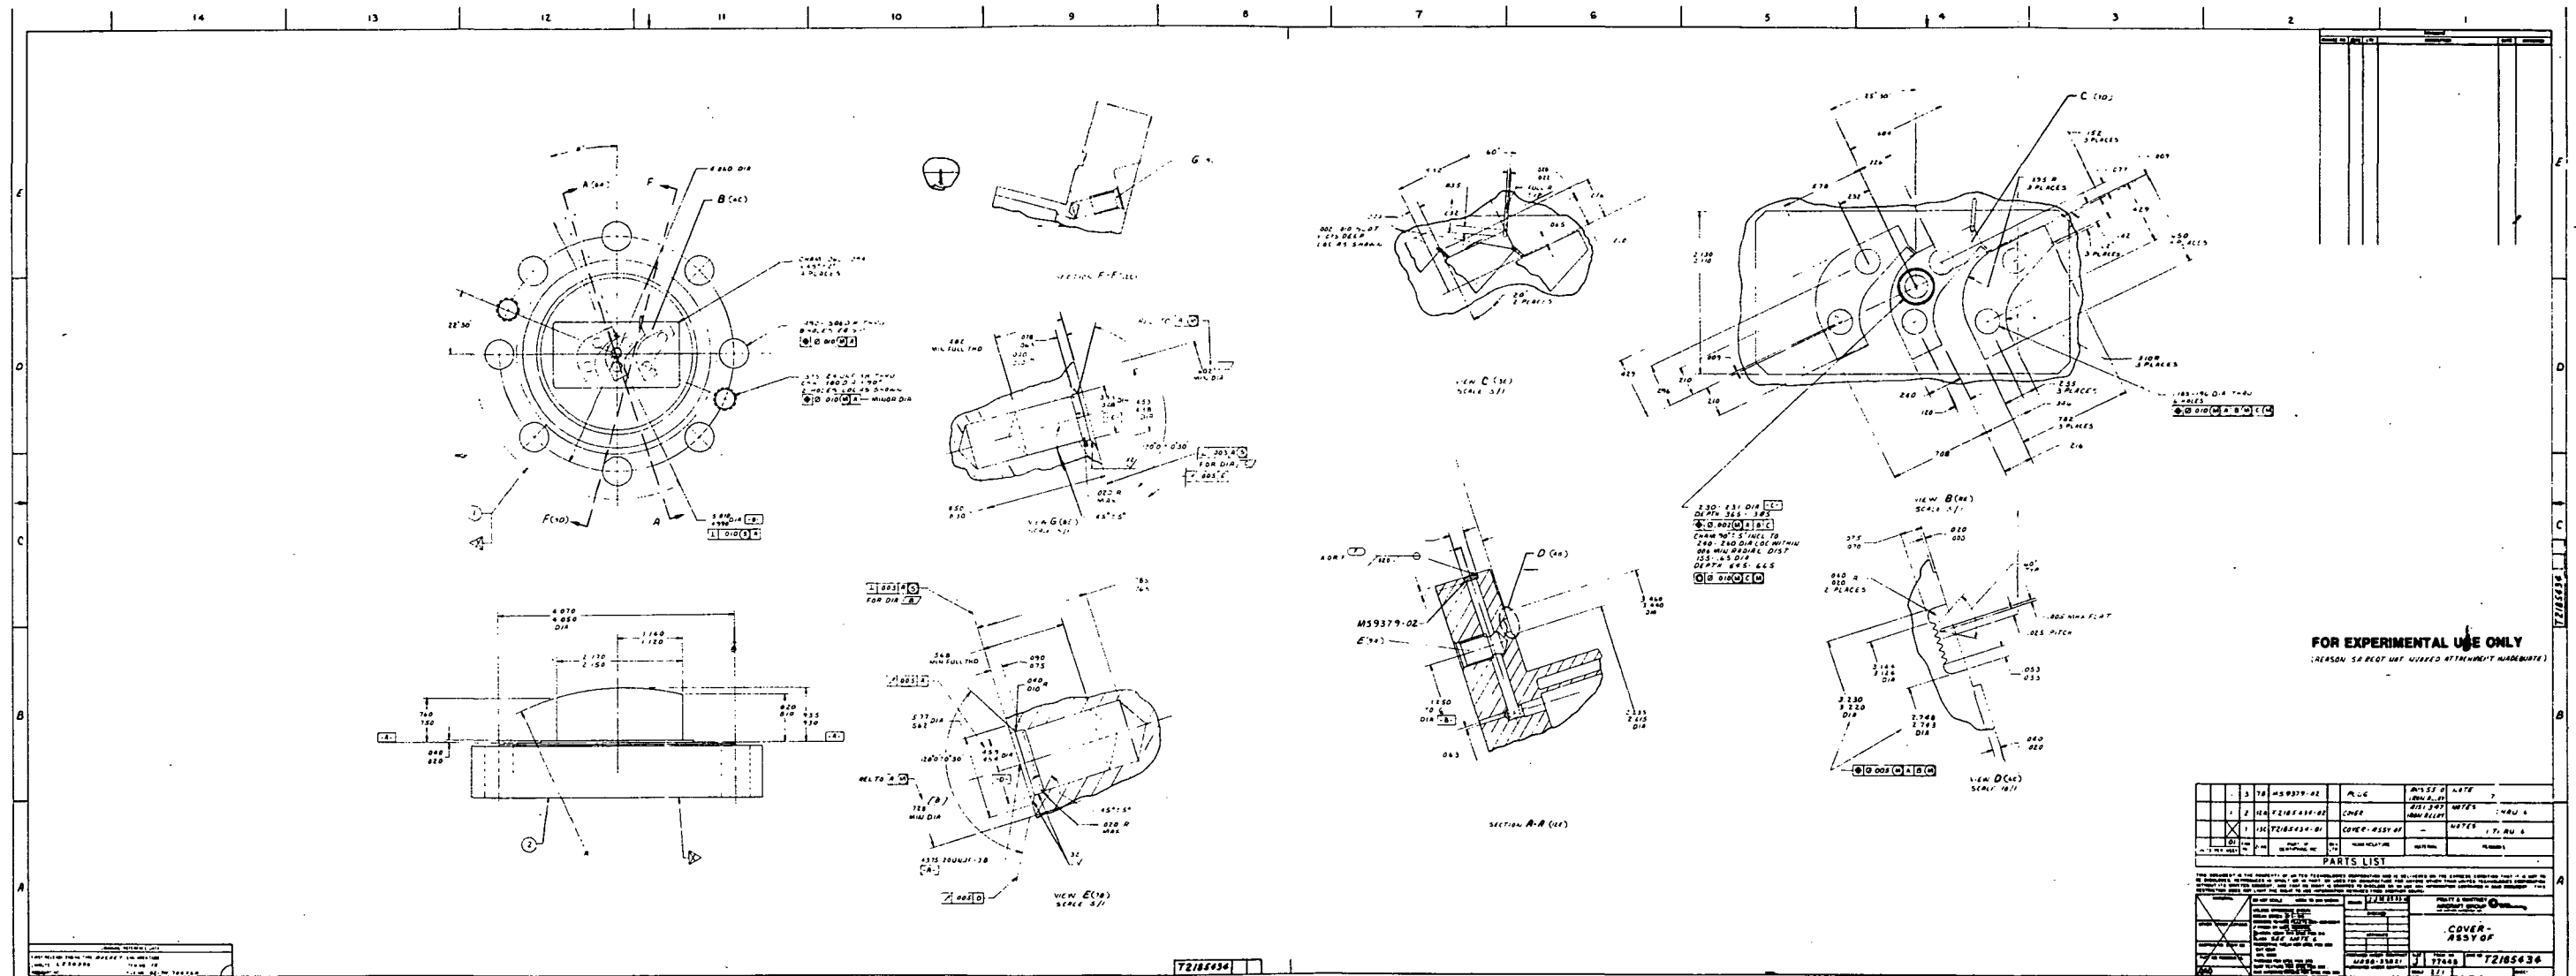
Detail Parts Drawing — Cover (Reduction of Original, Not to Scale)
